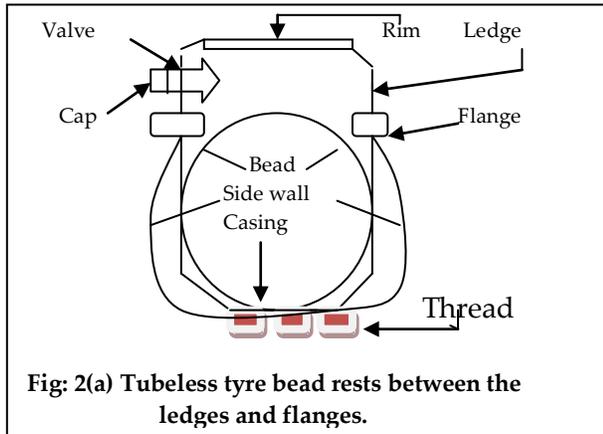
(a) Tubeless tyre bead rests between the ledges and flanges.
